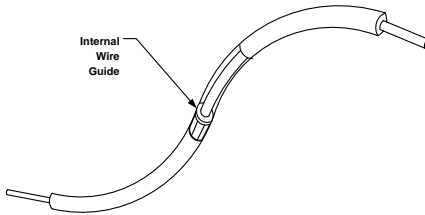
Bendable Tube with Internal Sliding Wire on Guides
